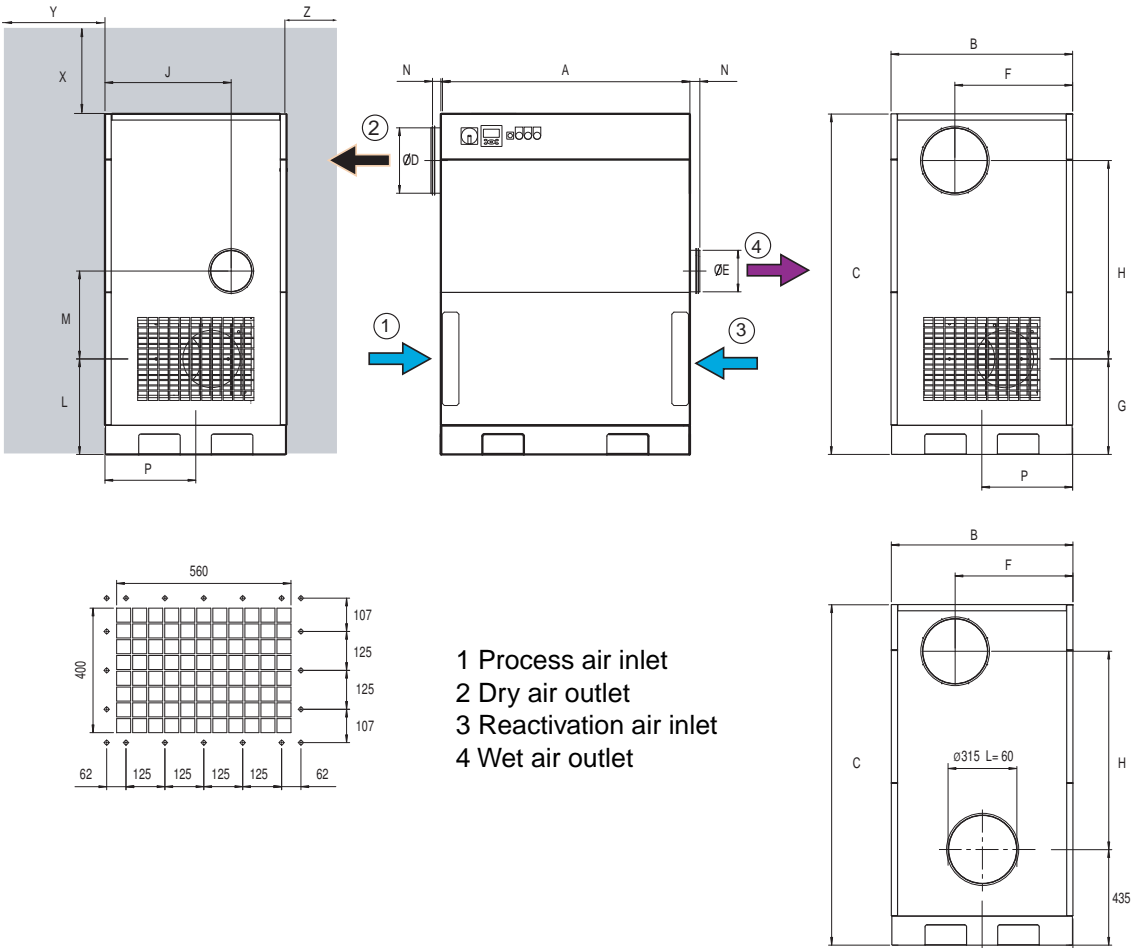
Dimensions and space requirements (IP version on bottom right)
